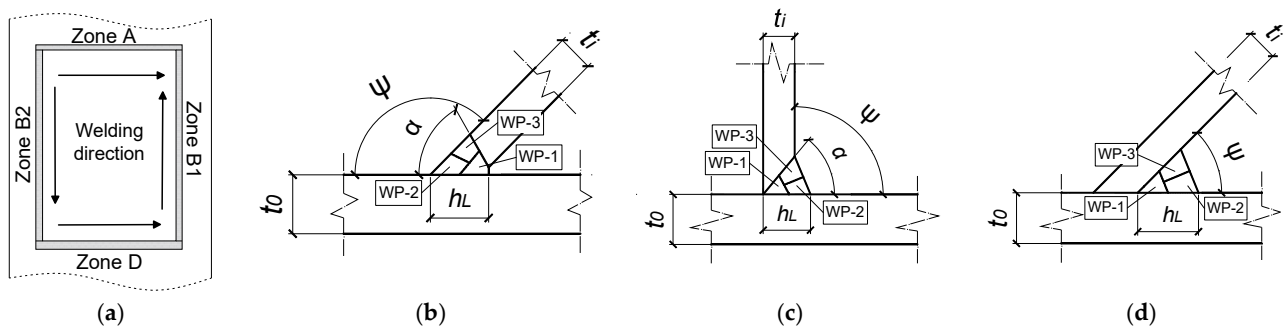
Schematic diagram of the tubular joint welding process (a); The appearance of welds in Zone A (b); The appearance of welds in Zone B1 and B2 (c); The appearance of welds in Zone D (d); (Ψ : dihedral angle).
